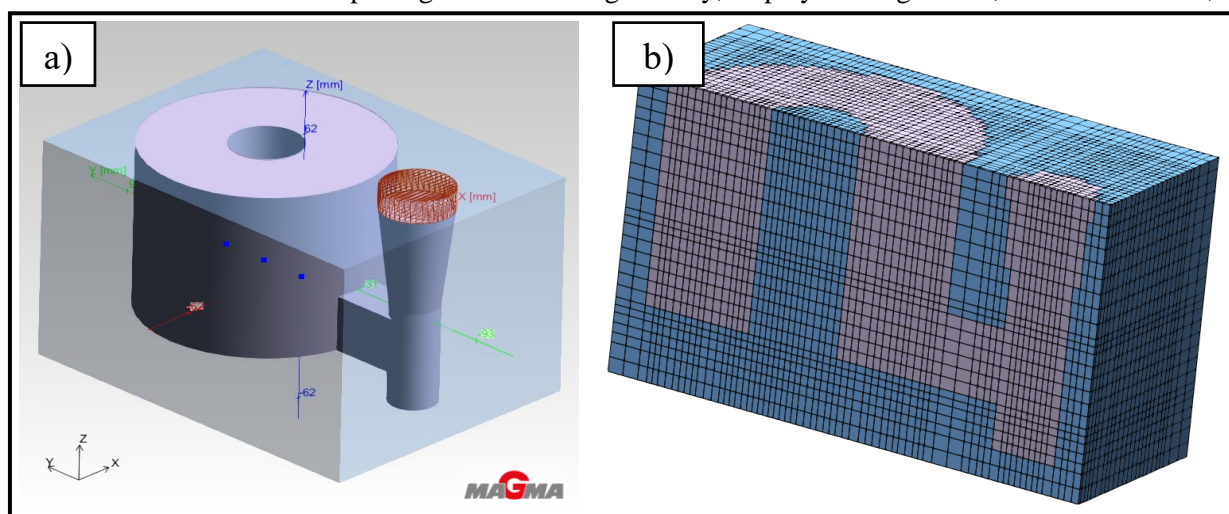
Images of mould 4 in Magma 5.4: (a) CAD drawing of the mould. The mould itself is displayed as transparent; and (b) Cross-sectional view along the parting line of the mould after meshing, with the displayed mesh consisting of 101,500 cells.
